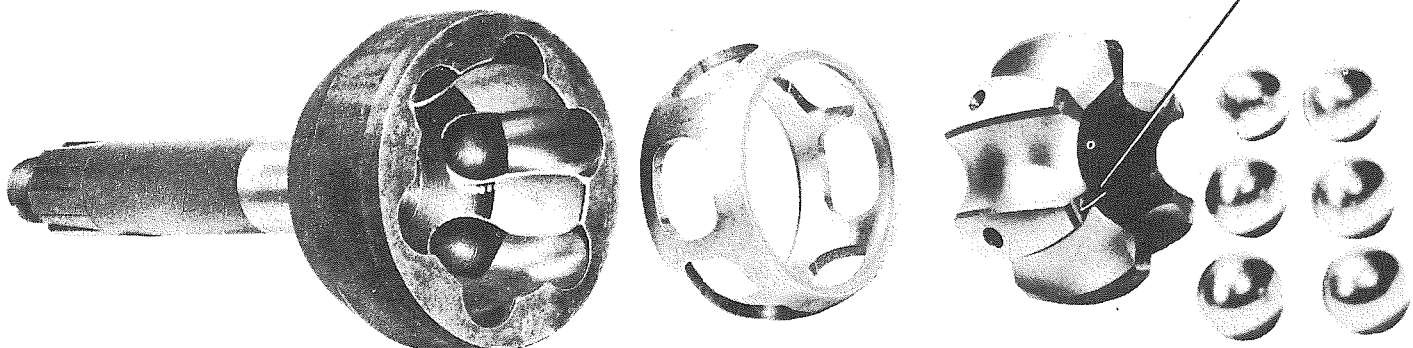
Bell Joint Assembly (Half-Shaft Assembly)
